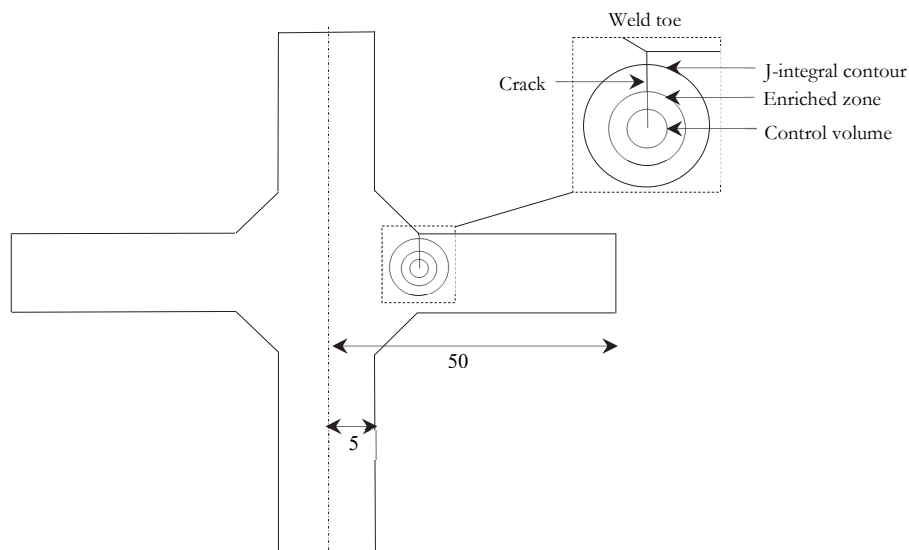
Geometry and dimension of cruciform welded joints involves a cracks specimen (mm scale).
